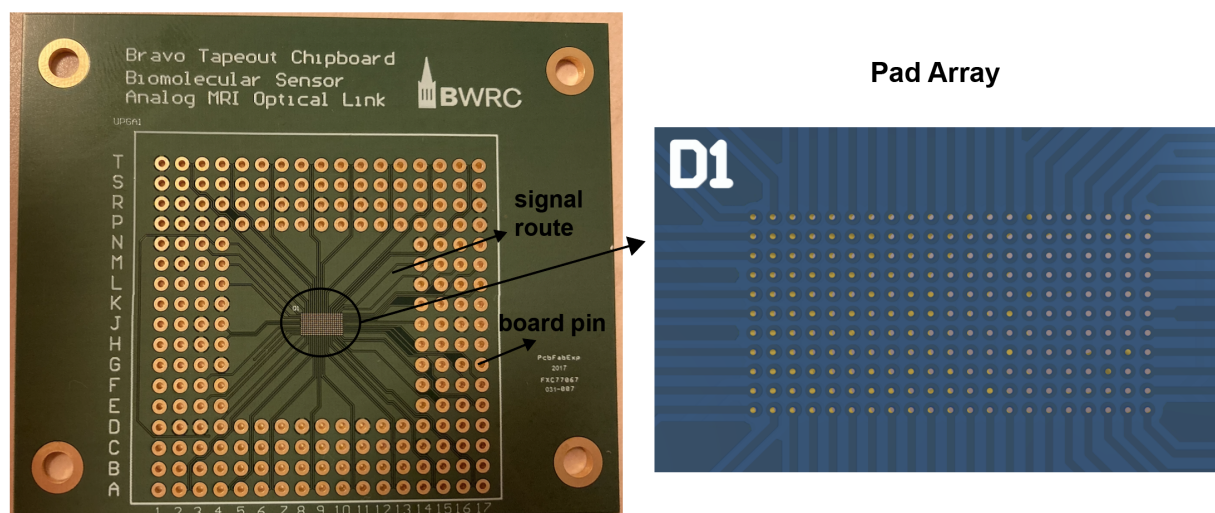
Chipboard design. The die is flipchipped on a 11x21 pad array on the board. Signals are routed to outer pins of the board at intermediate plane layers.
